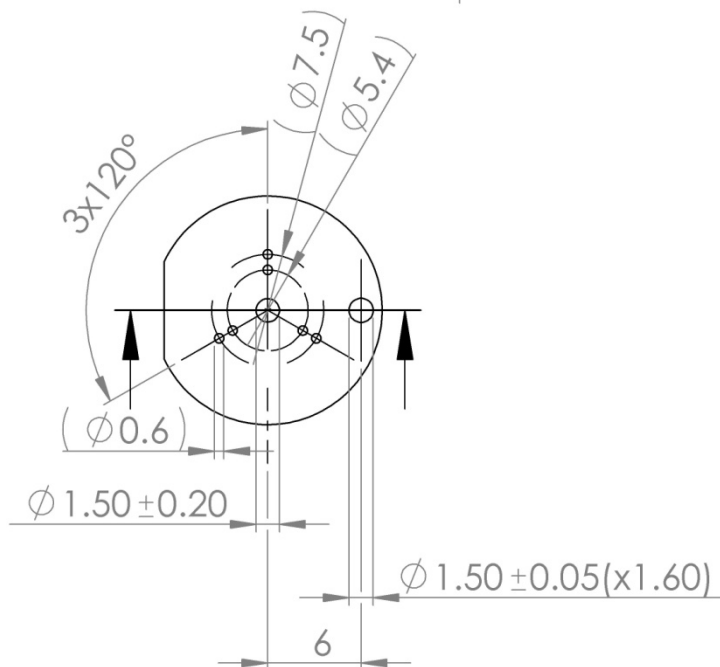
Bottom view. Center hole is for fluid flow, six eccentric holes for gas venting.
